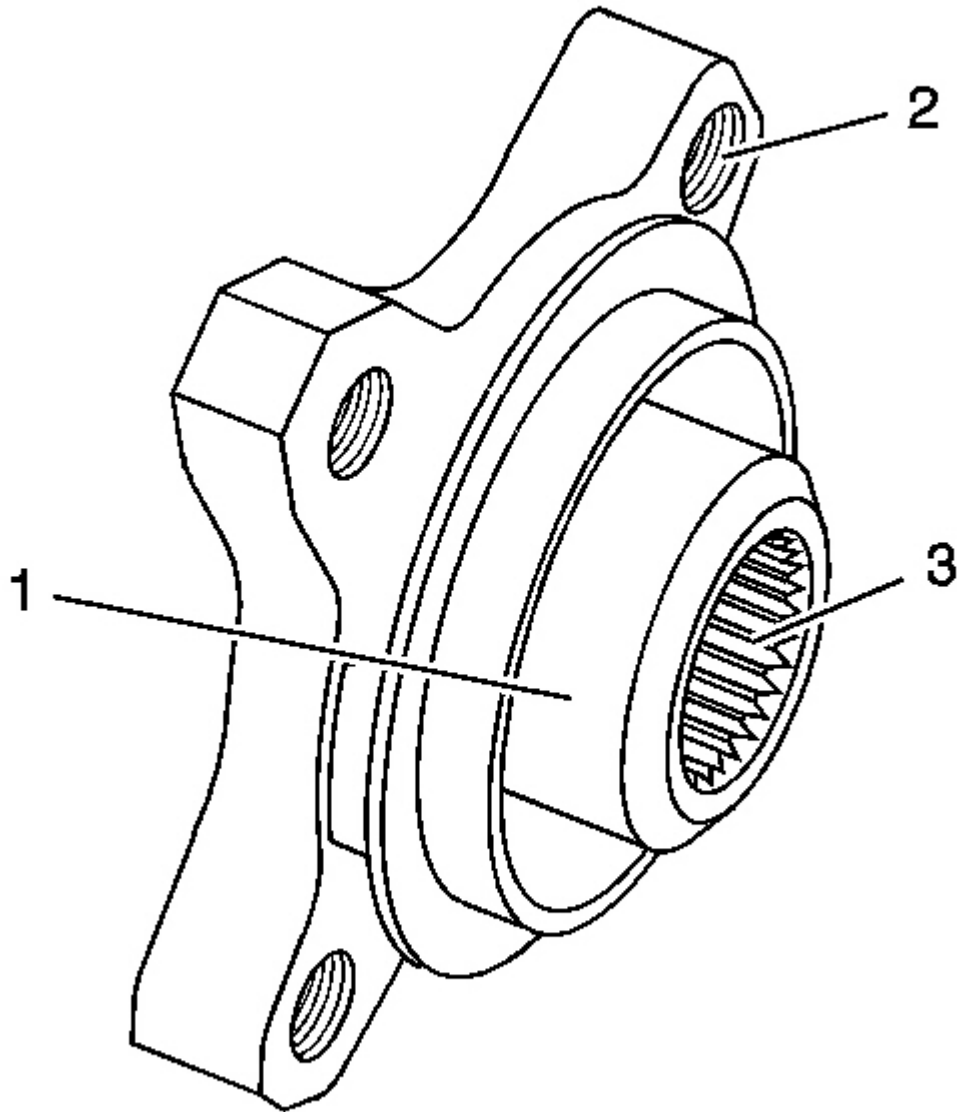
Inspecting Pinion Flange Sealing Surface
